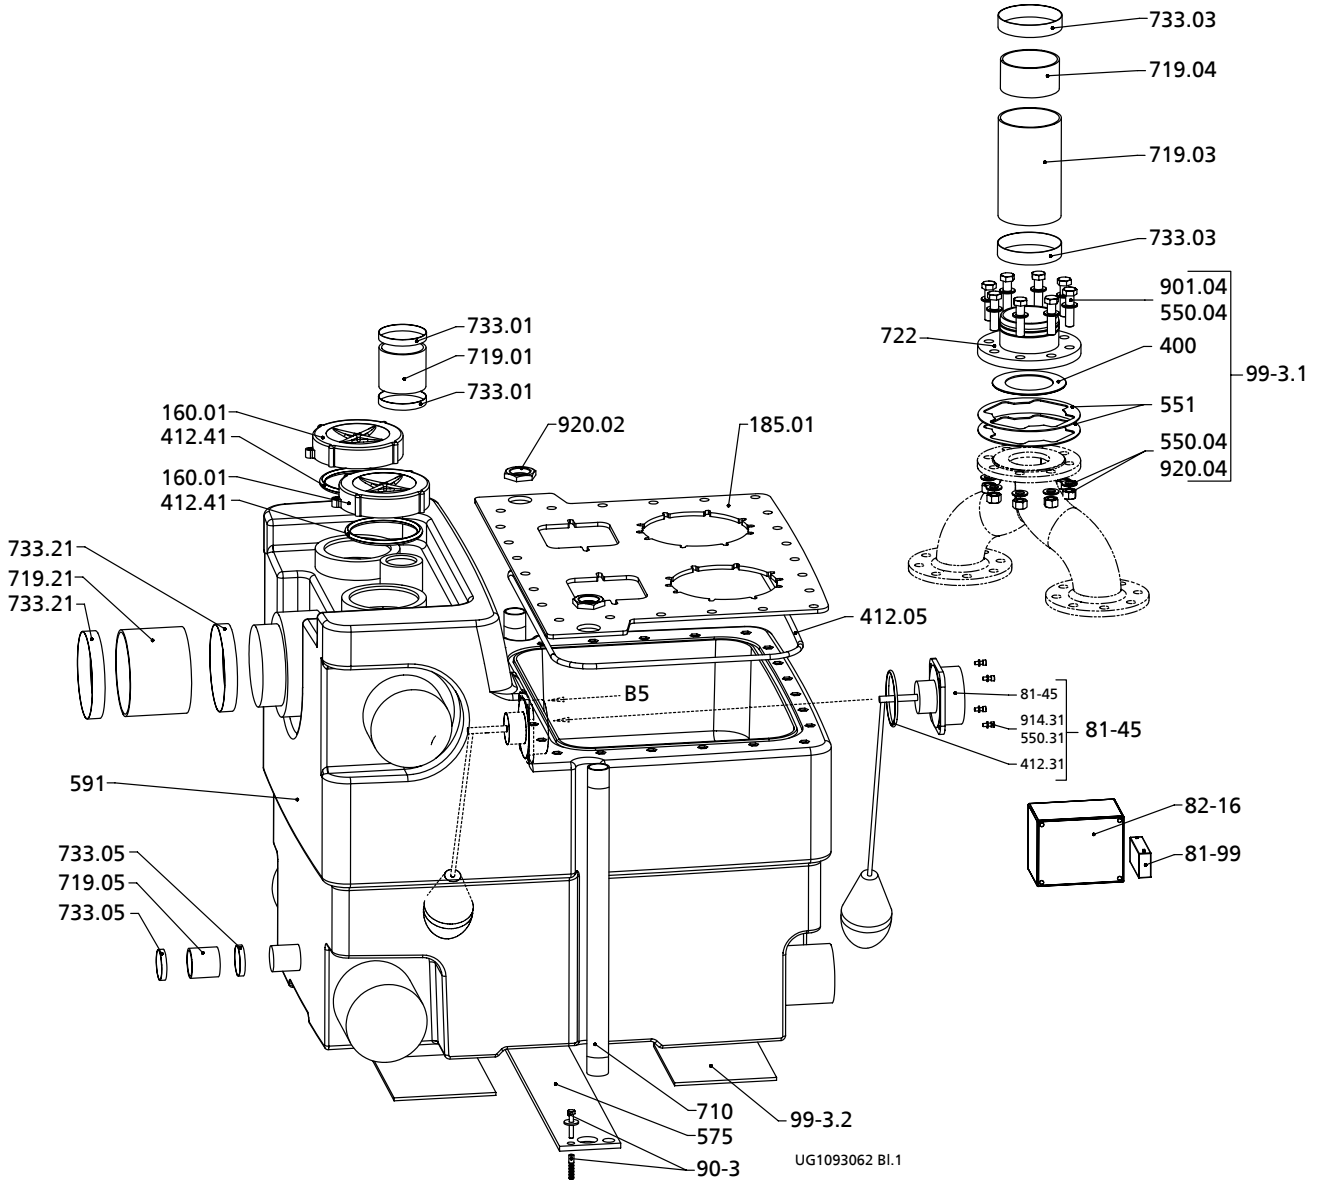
Exploded view of Compacta UZ450 and UZ900
